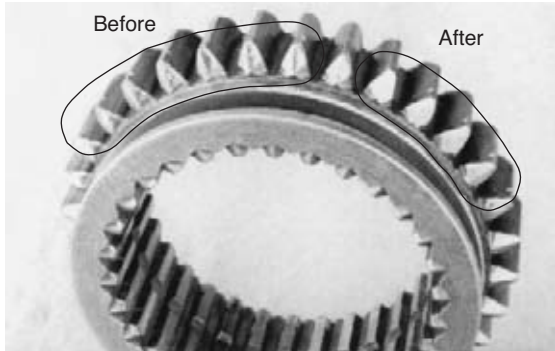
Teeth of a reverse gear before and after being touched up with a grinder.
